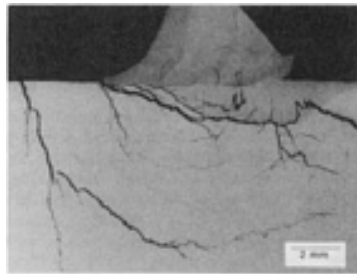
TRANSGRANULAR SCC THAT HAS INITIATED NEAR THE TOE OF A WELD IN TYPE 316L ALLOY
